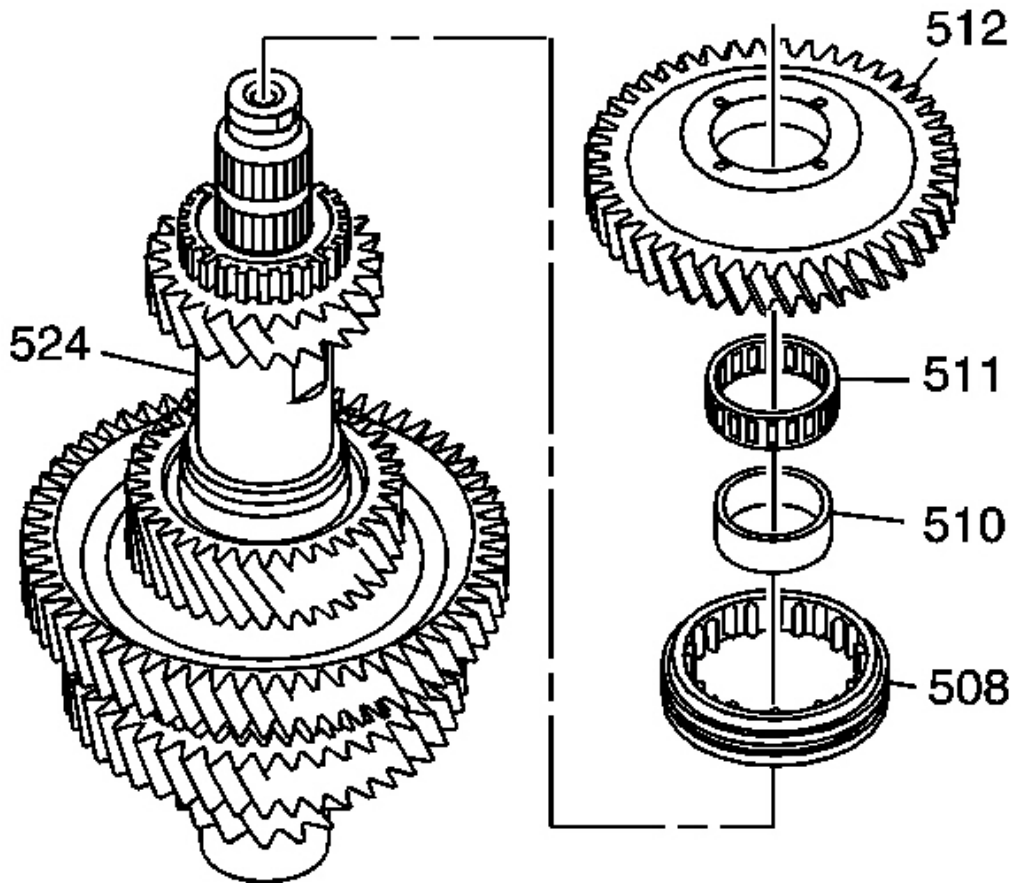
Reverse Driven Gear Output Shaft & Components Removed
